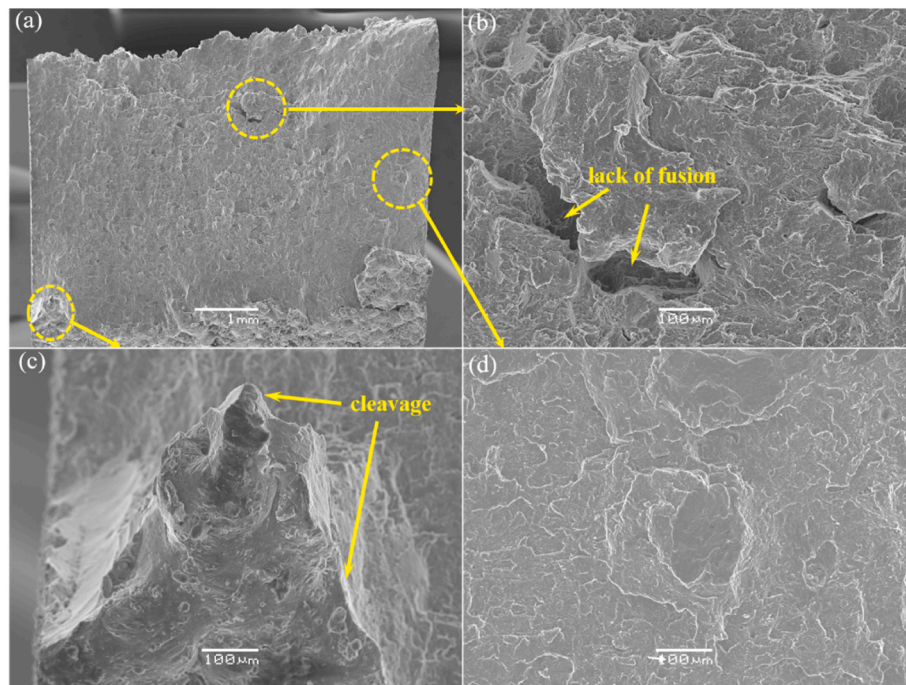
SEM micrograph of fractured surface of XZ specimen: (a) cross-section view and (b) lack of fusion defect; (c) cleavage surface and (d) flat smooth surface after fracture.
